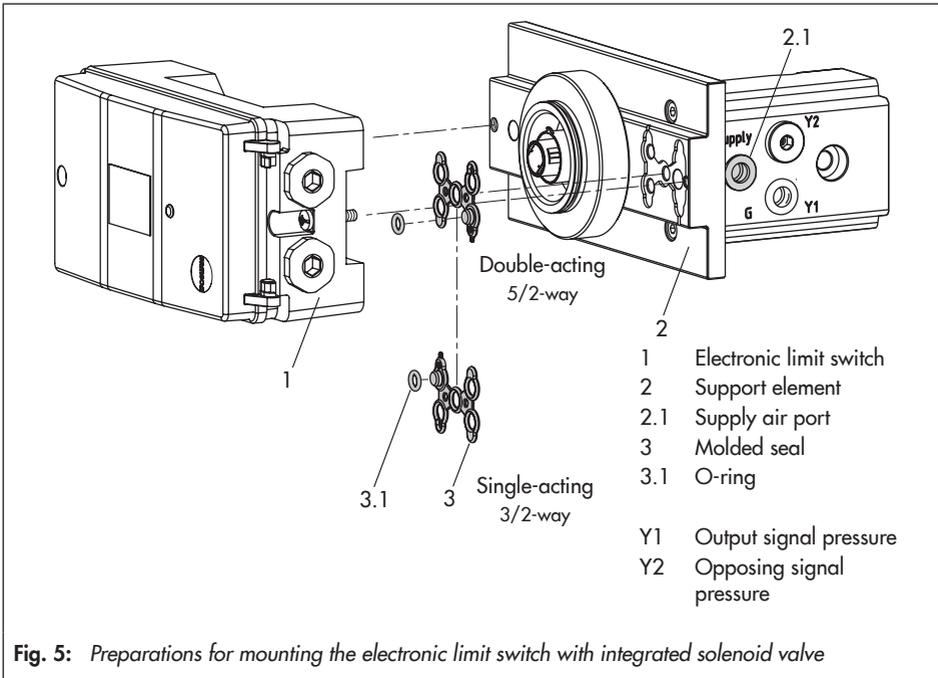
Preparations for mounting the electronic limit switch with integrated solenoid valve
